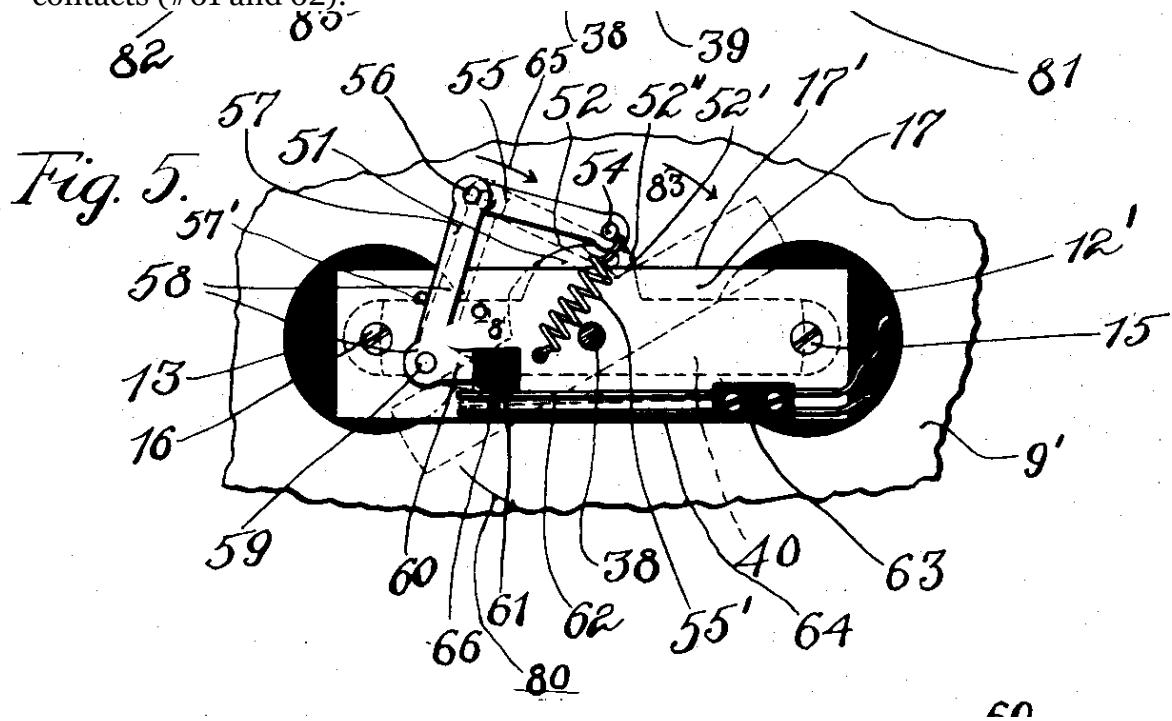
, Detail from patent #868,696 showing Armature and Contact arrangement in plan view.
